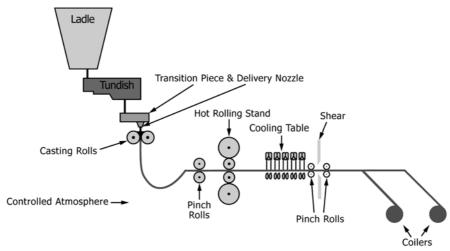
Layout of a Twin-Roll Casting Machine Showing the In-Line Hot Rolling Mill
